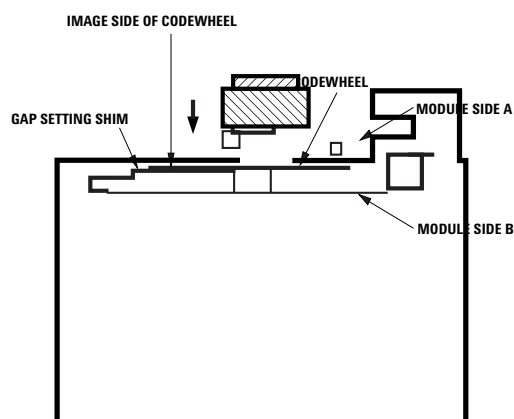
Alignment Tool is Used to Set Height of Codewheel.
